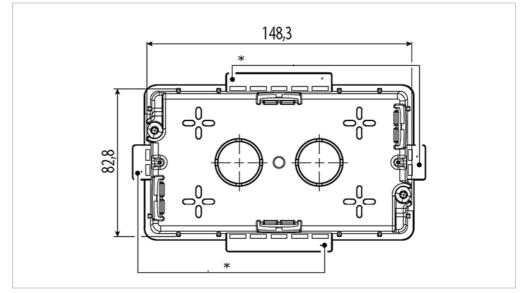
Rear view ISYteq Touch 4.0 IC with drill hole spacing (dimensions in mm)
